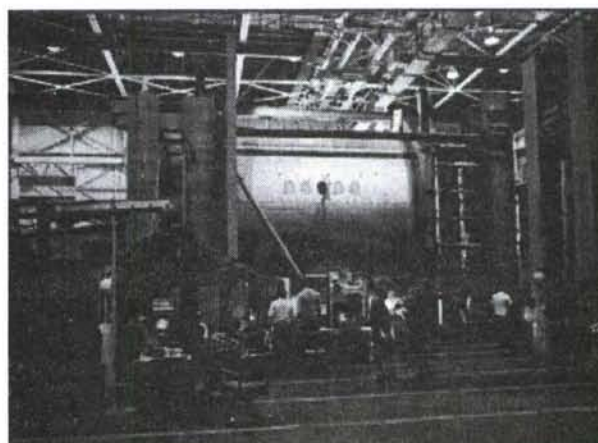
Fatigue and Damage Tolerance Testing of 777 Fuselage Section
